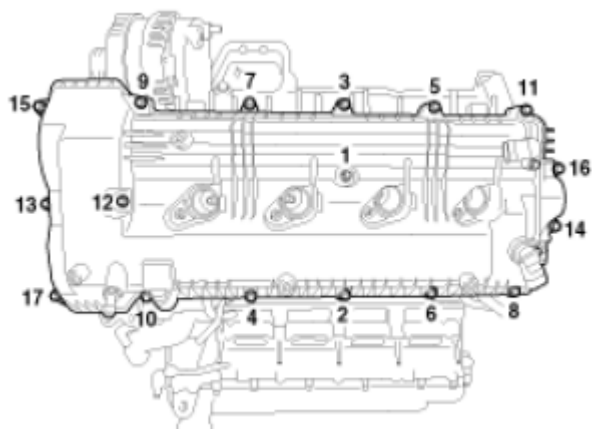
Identifying Cylinder Head Cover Bolts Tightening Sequence (RH)
